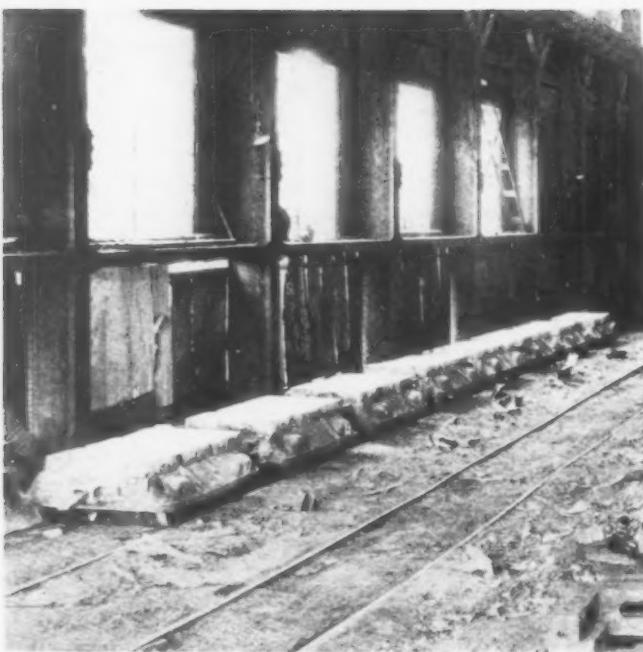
Ingot Mold Stools Used for Top Pouring of Ordinary Ingots. Stools Are Mounted on Ingot Cars
